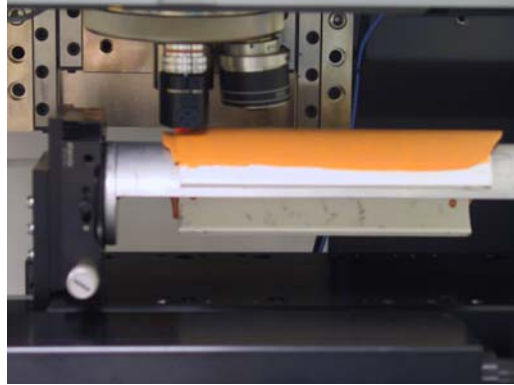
View of a Replica Mounted on a Rotating Fixture Being Inspected Using a White-Light Microscope
